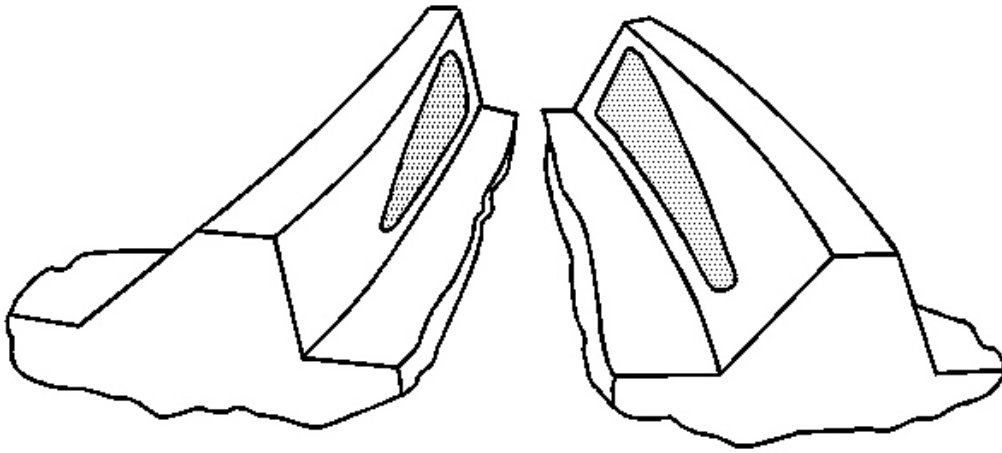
Drive Side Toe - Coast Side Toe Contact Pattern
